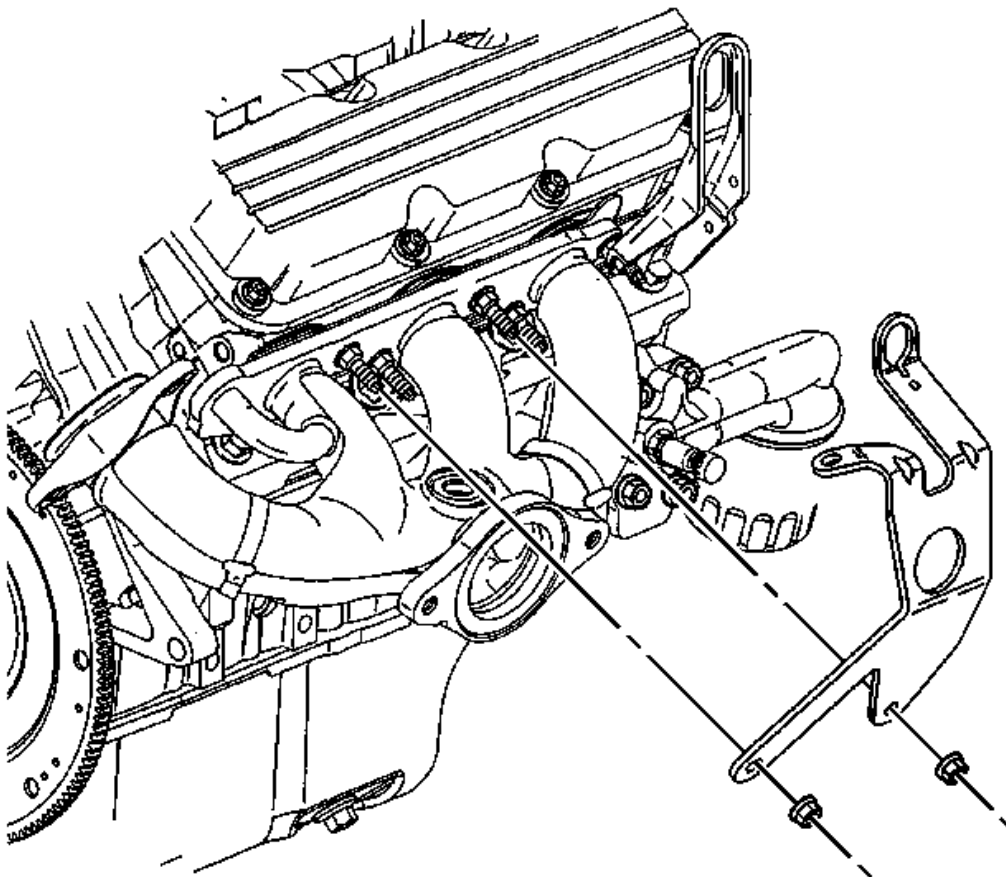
Removing Fuel Injector Sight Shield Bracket
